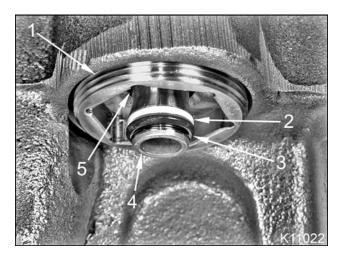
Injector oil inlet adapter installed in high-pressure oil rail
